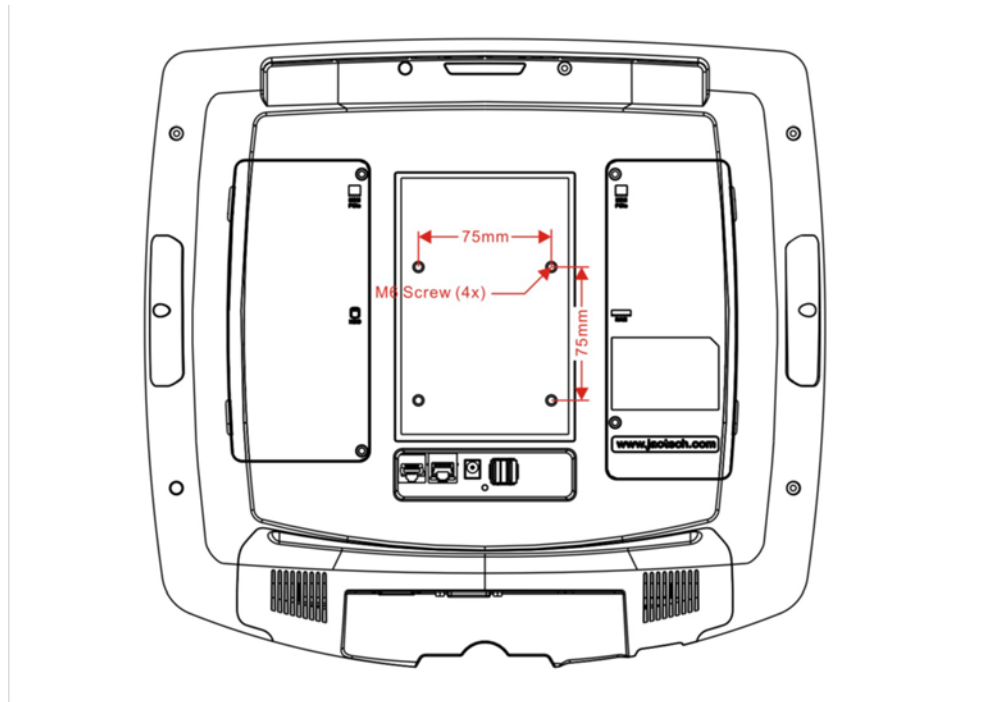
VESA mounting dimension diagram (75 x 75 mm)
